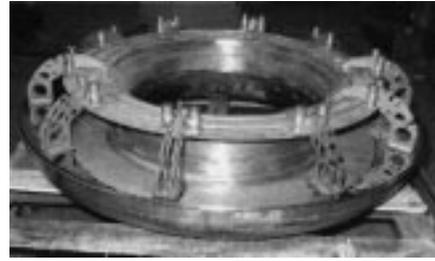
Support frames adjusted to the dummy coil form and to the lower half-vessel. The top of each frame has two cylinders with Inconel 625 springs providing 450 kg compression to the coil inside the helium vessel after the final closure.
